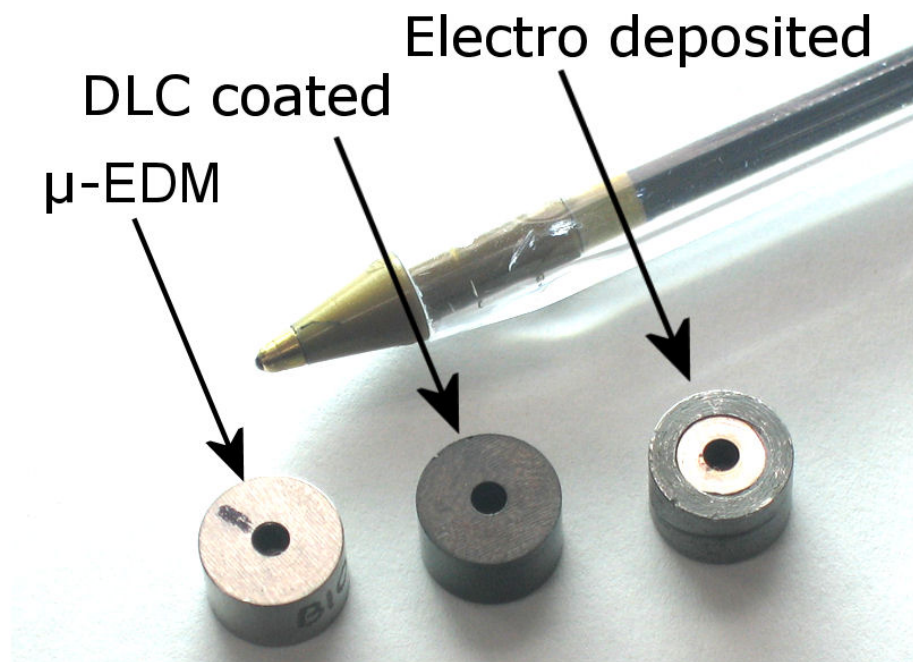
Photograph of micro forming dies manufactured using electroplating and EDM processes. The black colored die in the center has been coated with DLC coating.
